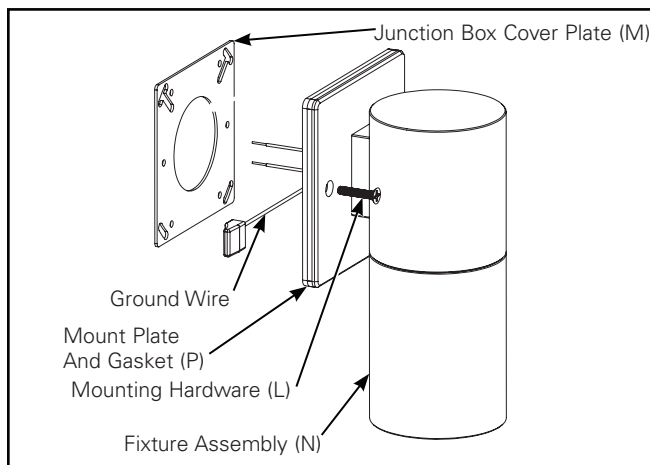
FIXTURE ASSEMBLY 9000-W1-WRS VERSION
